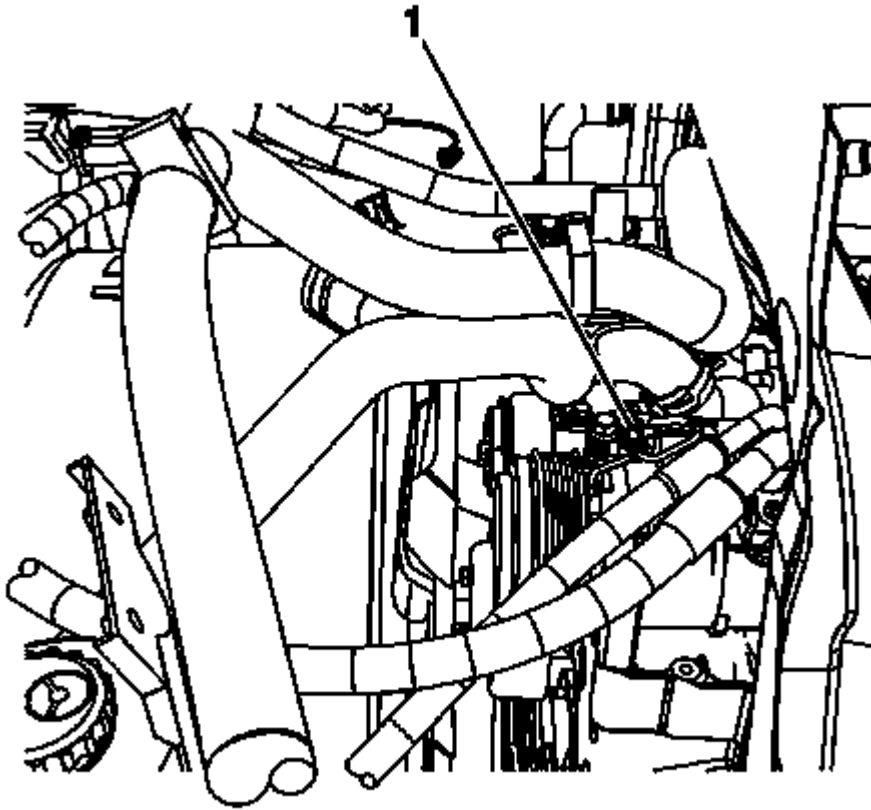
Locating Air Conditioning (A/C) Compressor Clutch
